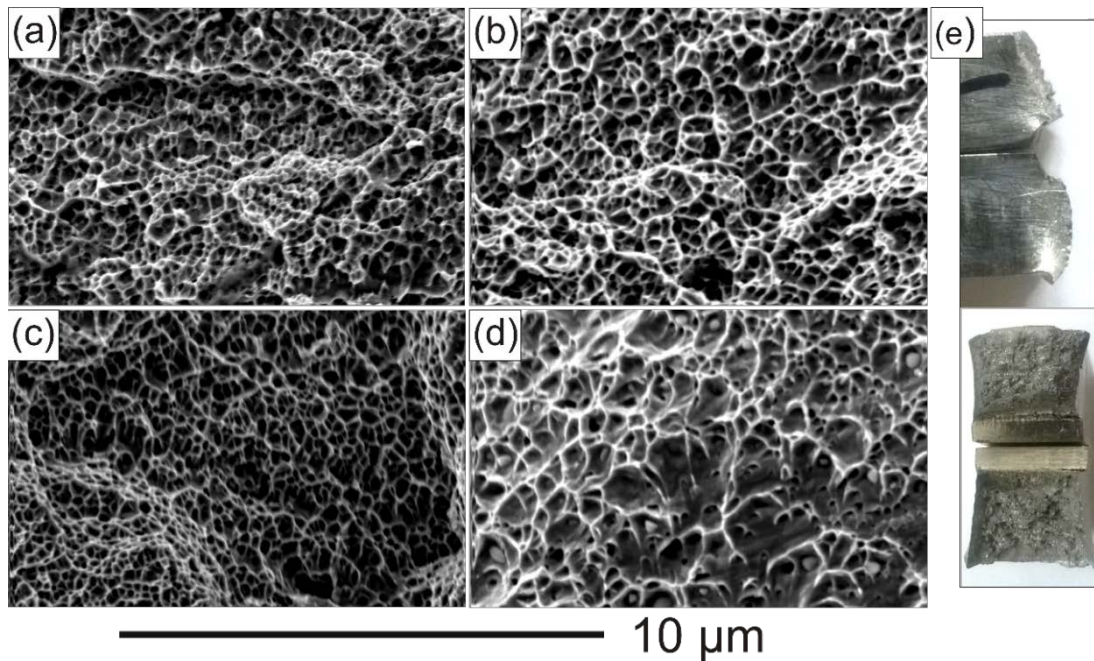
Fracture surfaces of SLM processed 316L after Charpy test using scanning electron microscope for (a) as built, (b) HT1, (c) HT2 and (d) HT3 samples. Optical image of side and front view of the surface fracture, showing a ductile mode (e).
